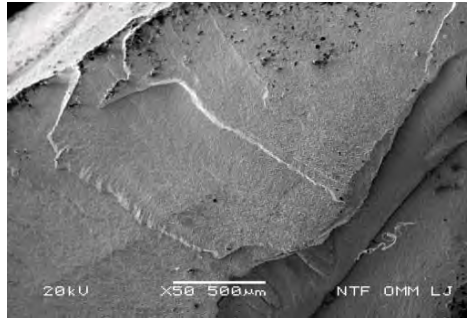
The fractured surface of steel plate PROTAC 500 (SEM).
